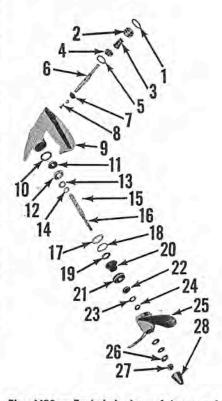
Exploded view of lower unit gearcose and associated parts.
